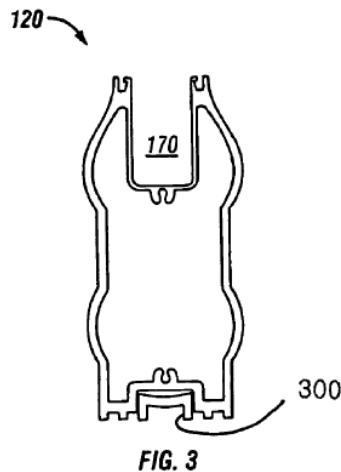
above shows a cross-sectional view of a clamping column used in Sprague '780's rail system shown in Figure 1. *Id.* at 2:12–13. Clamping column 120 (and similarly, clamping column 130) includes recess 170 that is structured to secure to bottom edge 180 of panel 110 (shown in Figure 1). *Id.* at 2:42–44. Sprague '790 discloses that first and second columns 120, 130 are formed of aluminum but that “it is preferable to use an attractive finish.” *Id.* at 3:6–10. According to Sprague '790, “[a]lternatively, conventional cladding, such as brass plates, may be placed over the exposed surfaces” by conventional means, such as an adhesive. *Id.* at 3:11–13.
